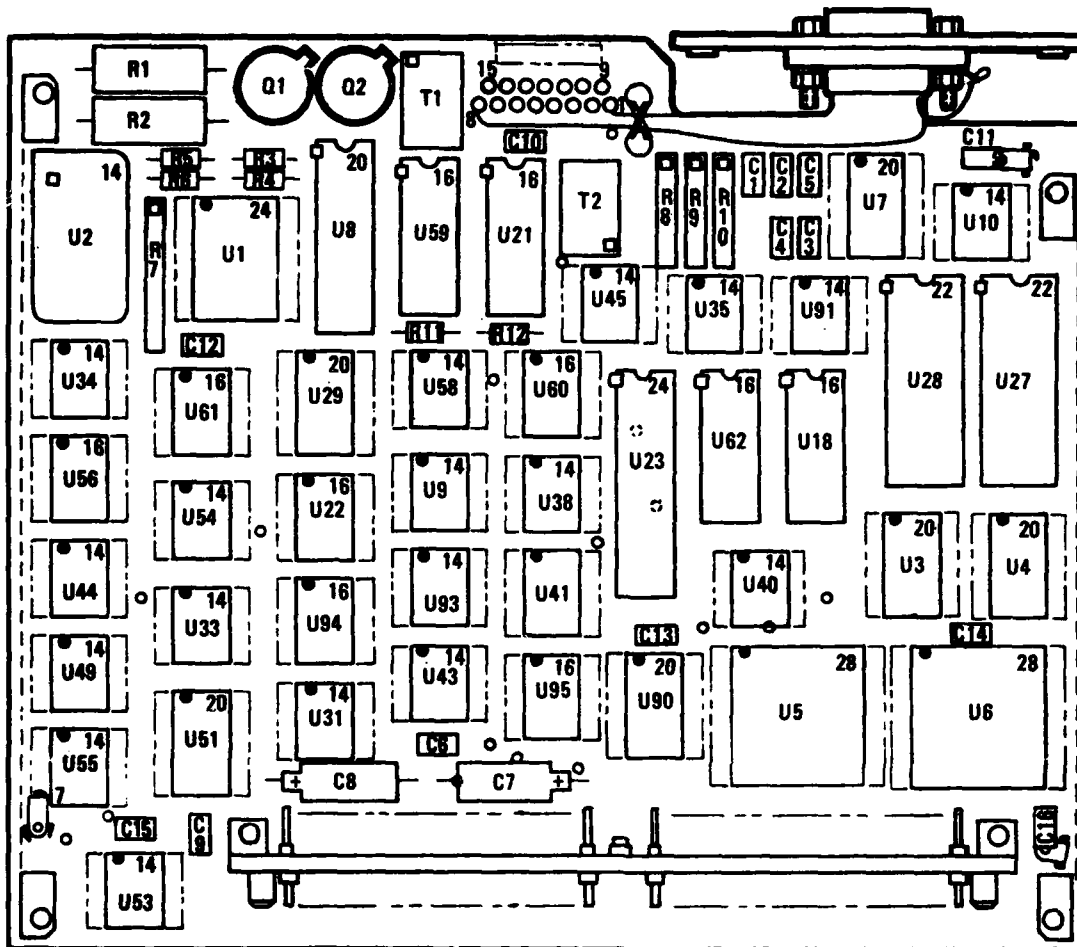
Top Level Assembly Drawing of MIL-STD-1553B
